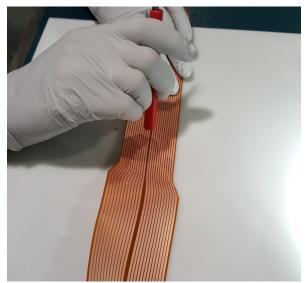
FlexPCB-like harness. As an example a measurement harness is shown, based on Krempel KCL 2-17/50 HAT.
